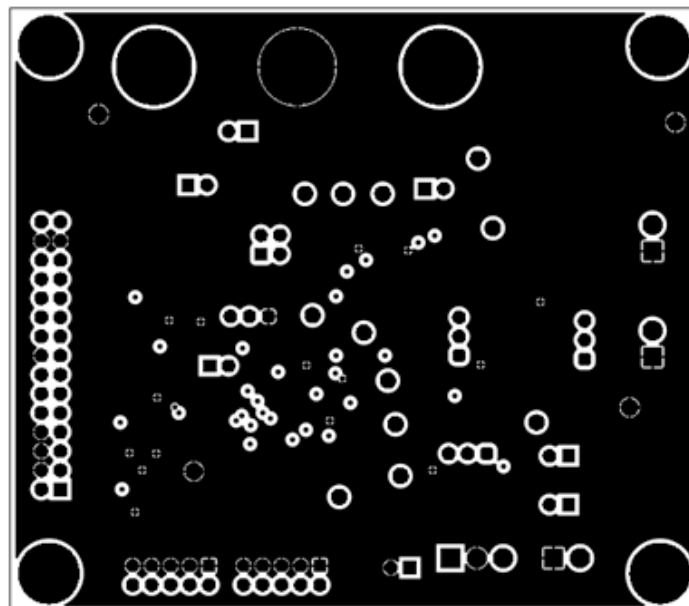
AFE881H1EVM PCB Mid Layer 1 Layout
